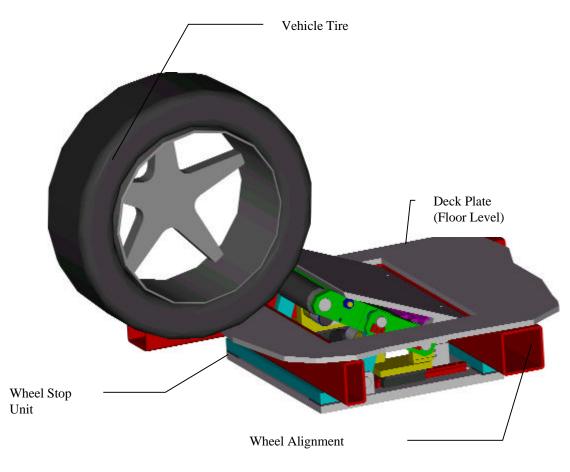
Working Assembly (Up Position) - Cut Away Section View
